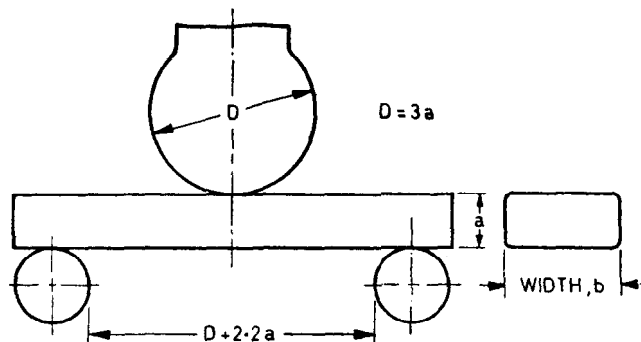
E METHOD OF TESTING SIDE BEND SPECIMENS
